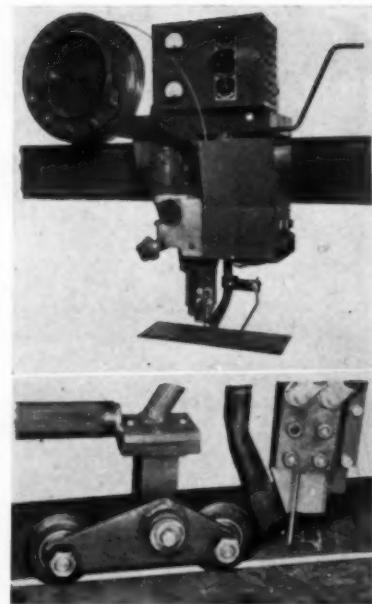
(Top) — New carriage type "Lincolnweld" mounted on overhead beam. Fig. 2 (Bottom) — Roller guide for "Lincolnweld" tractor showing rollers in butt joint of work.
